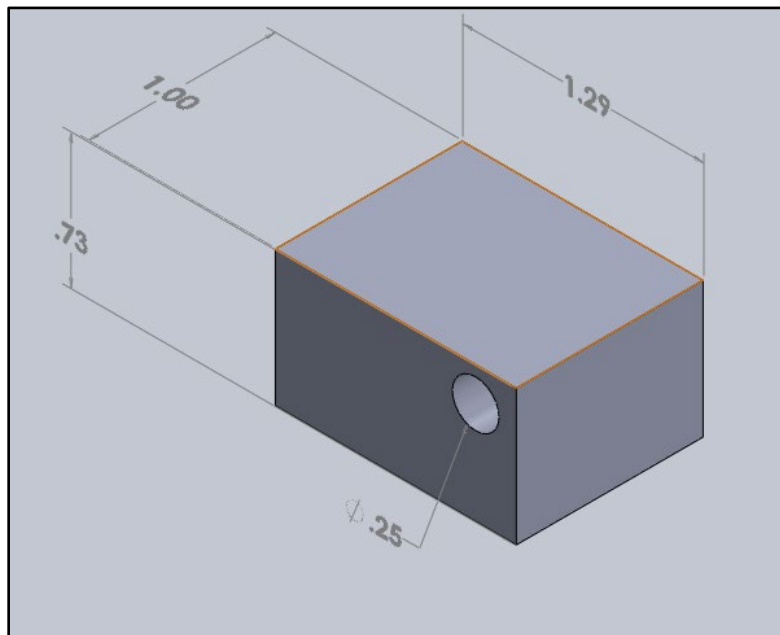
Notch Isometric View (connects rack gear to pillow board)
